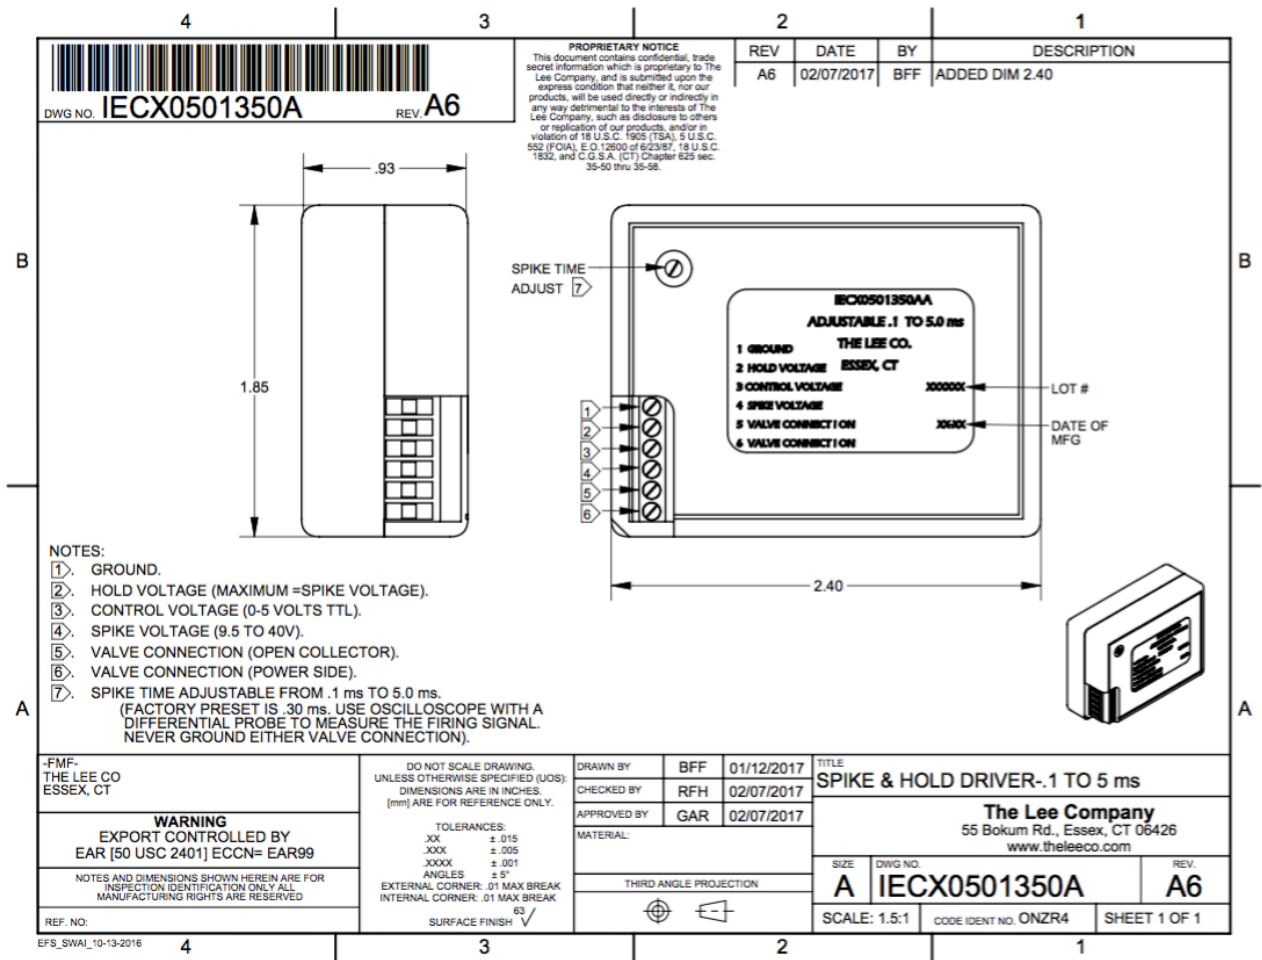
Specification sheet of the Lee Company's Spike & Hold Driver [2].
